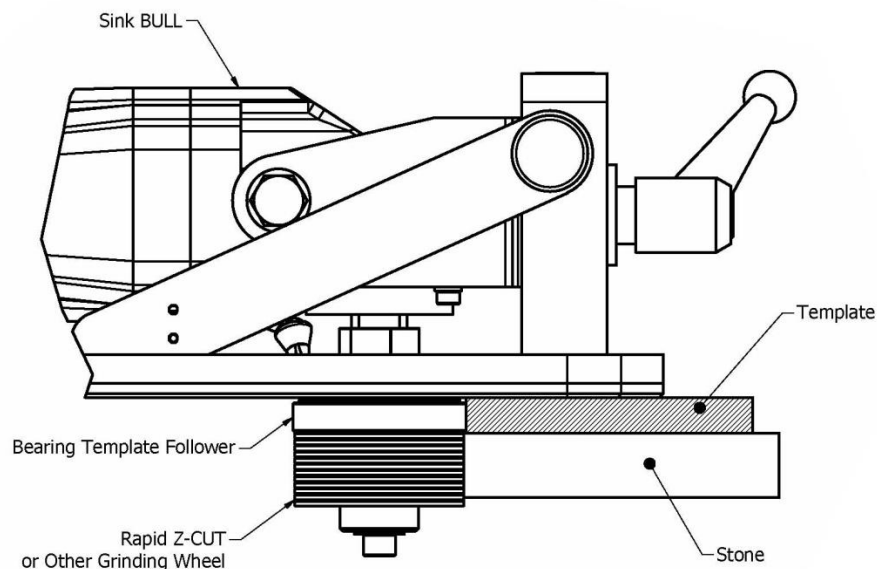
Set Grinding Wheel Height so Bearing Rides on Template
